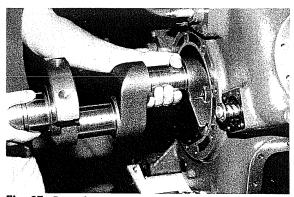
Drawing Out Crankshaft Using Side Seal Balance Portion
